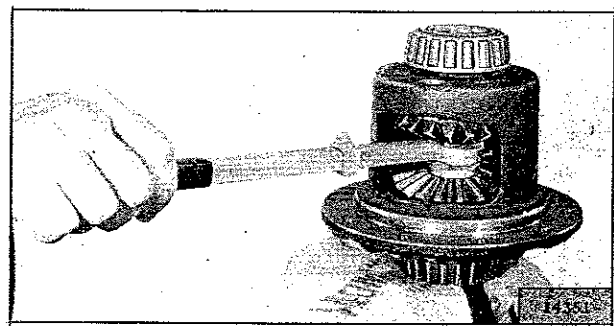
INSTALLING GEAR ROTATING TOOL
